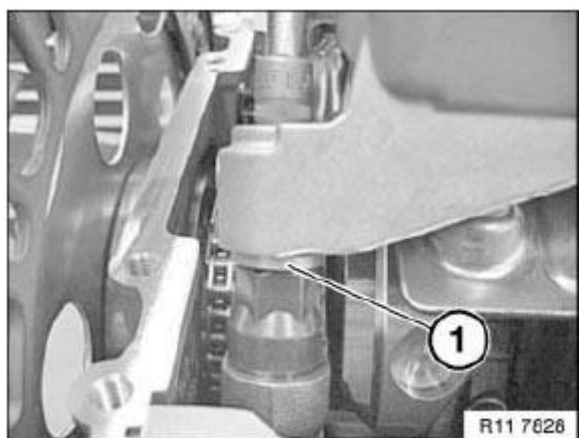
Identifying Oil Pump Adjusting Sleeve
